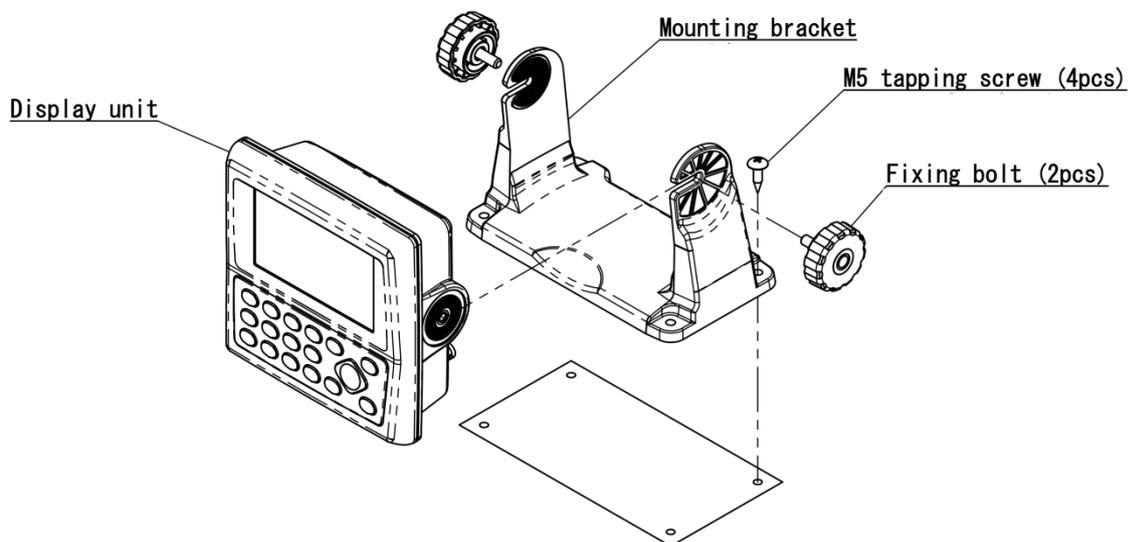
Fitting detail of KC-14 in table mounting mode
